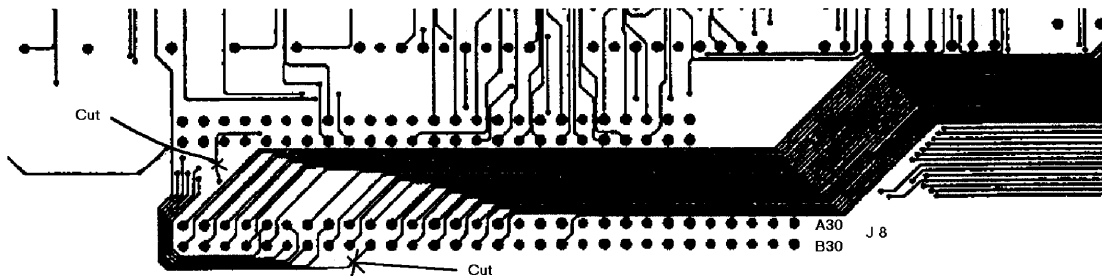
The position of the traces to cut on SYSTEM-LF 30 PCB solders side
